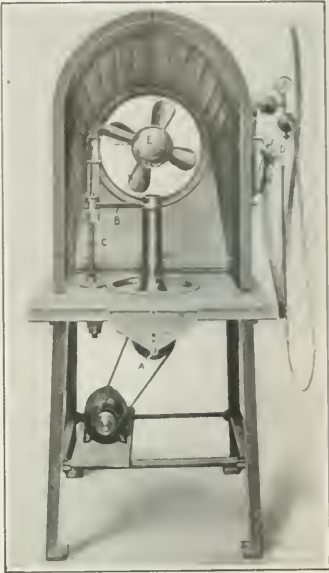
De Vilbiss Spraying Device used in coating Exterior of High-explosive Shells
